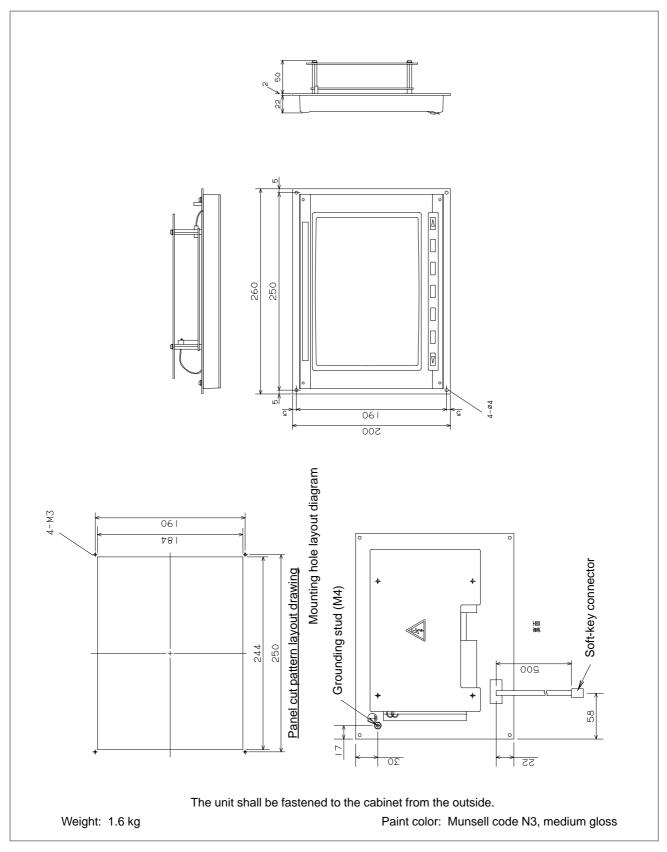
7.2" Monochrome LCD Unit Outline Drawing
